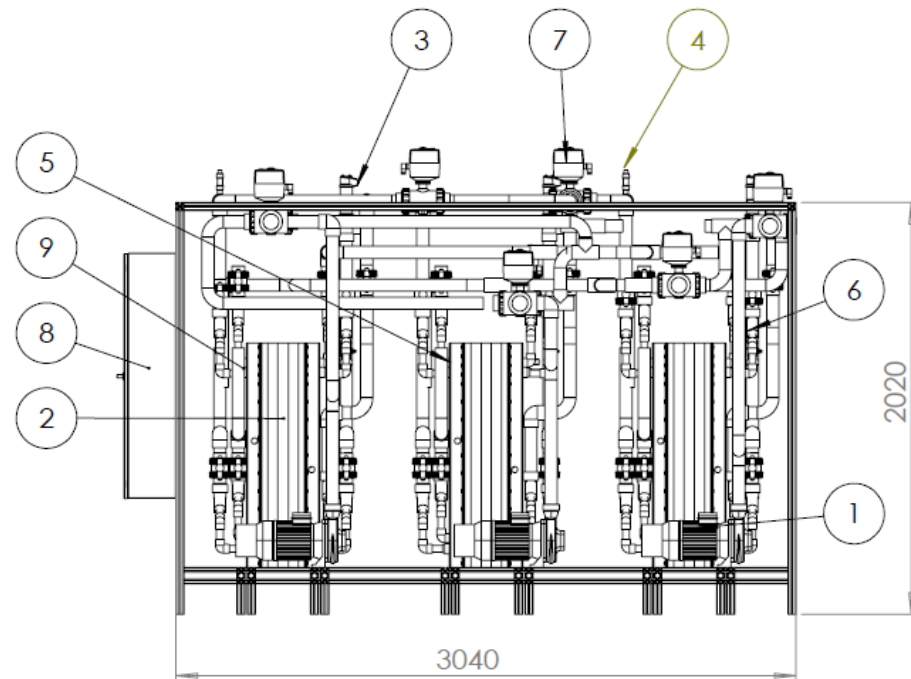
Dimensional Overview – Key Measurements of Skid Assembly
